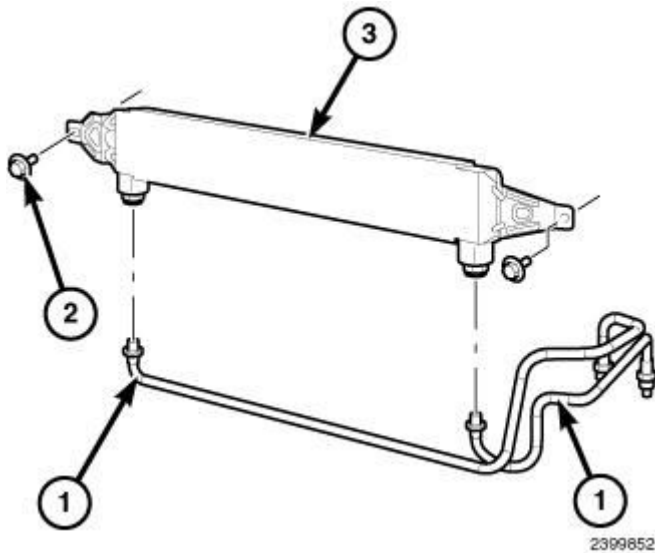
Transmission Cooler Lines And Transmission Oil Cooler
